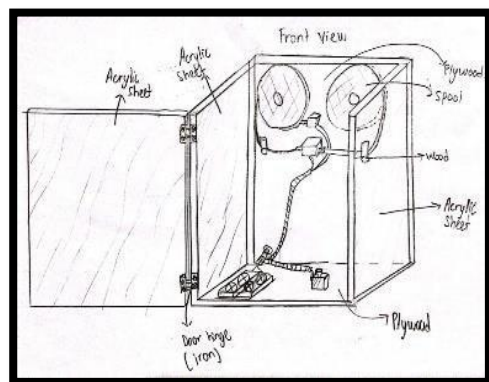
Design 1 (Mechanical parts) for filament extrusion machine
